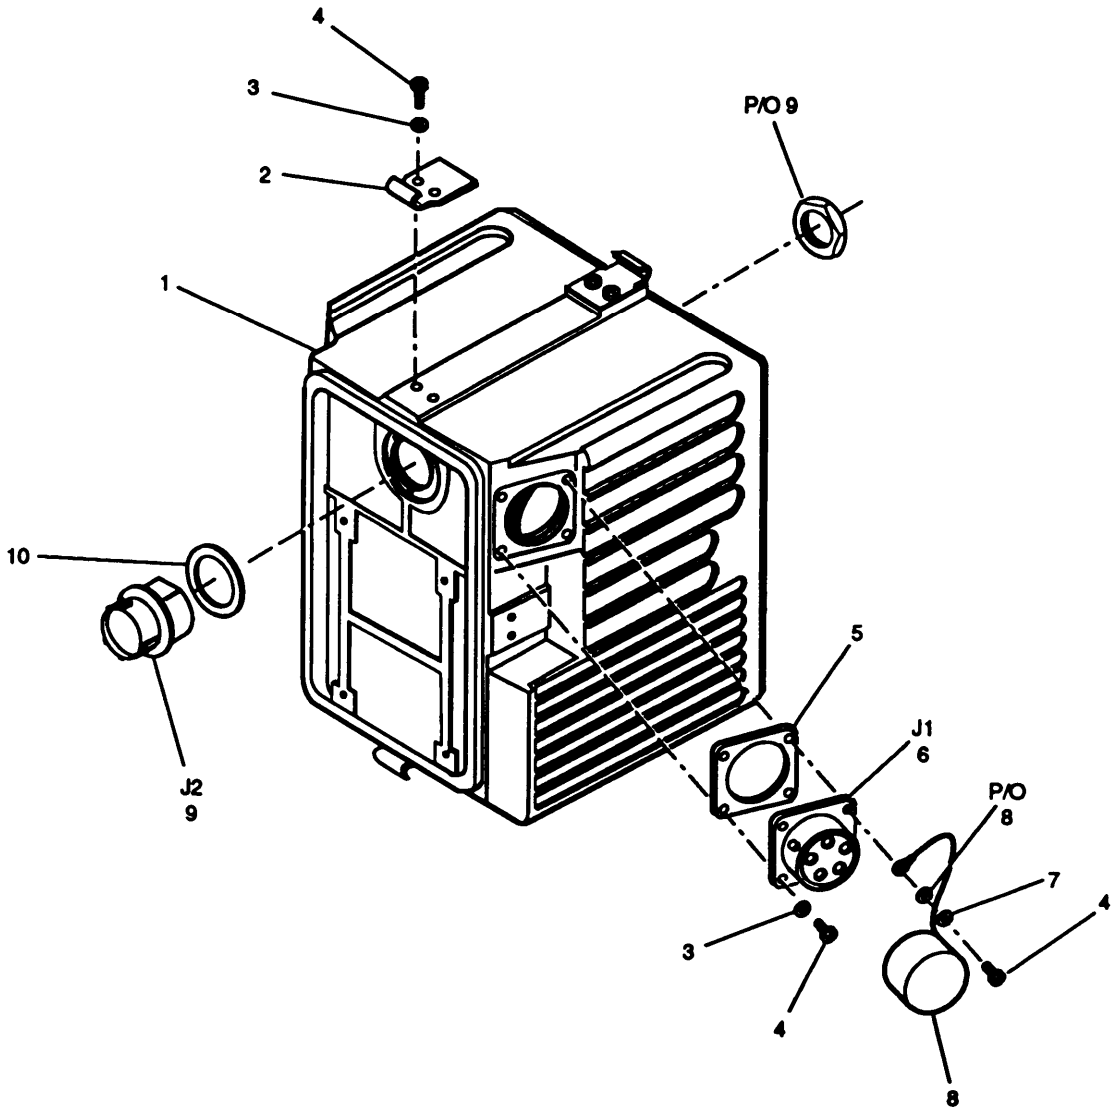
Battery Box Housing Assembly (Sheet 1 of 2)
